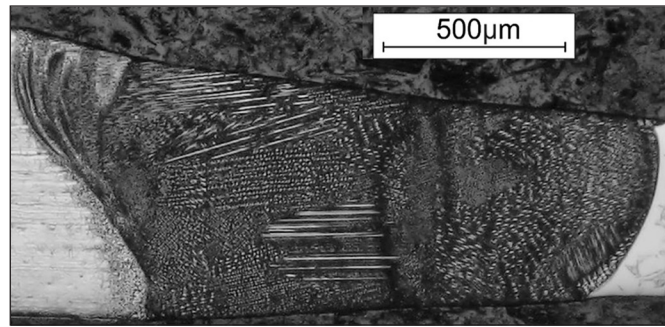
Cross-section macro-photograph showing electron beam welds of Inconel 625 and AISI 430
